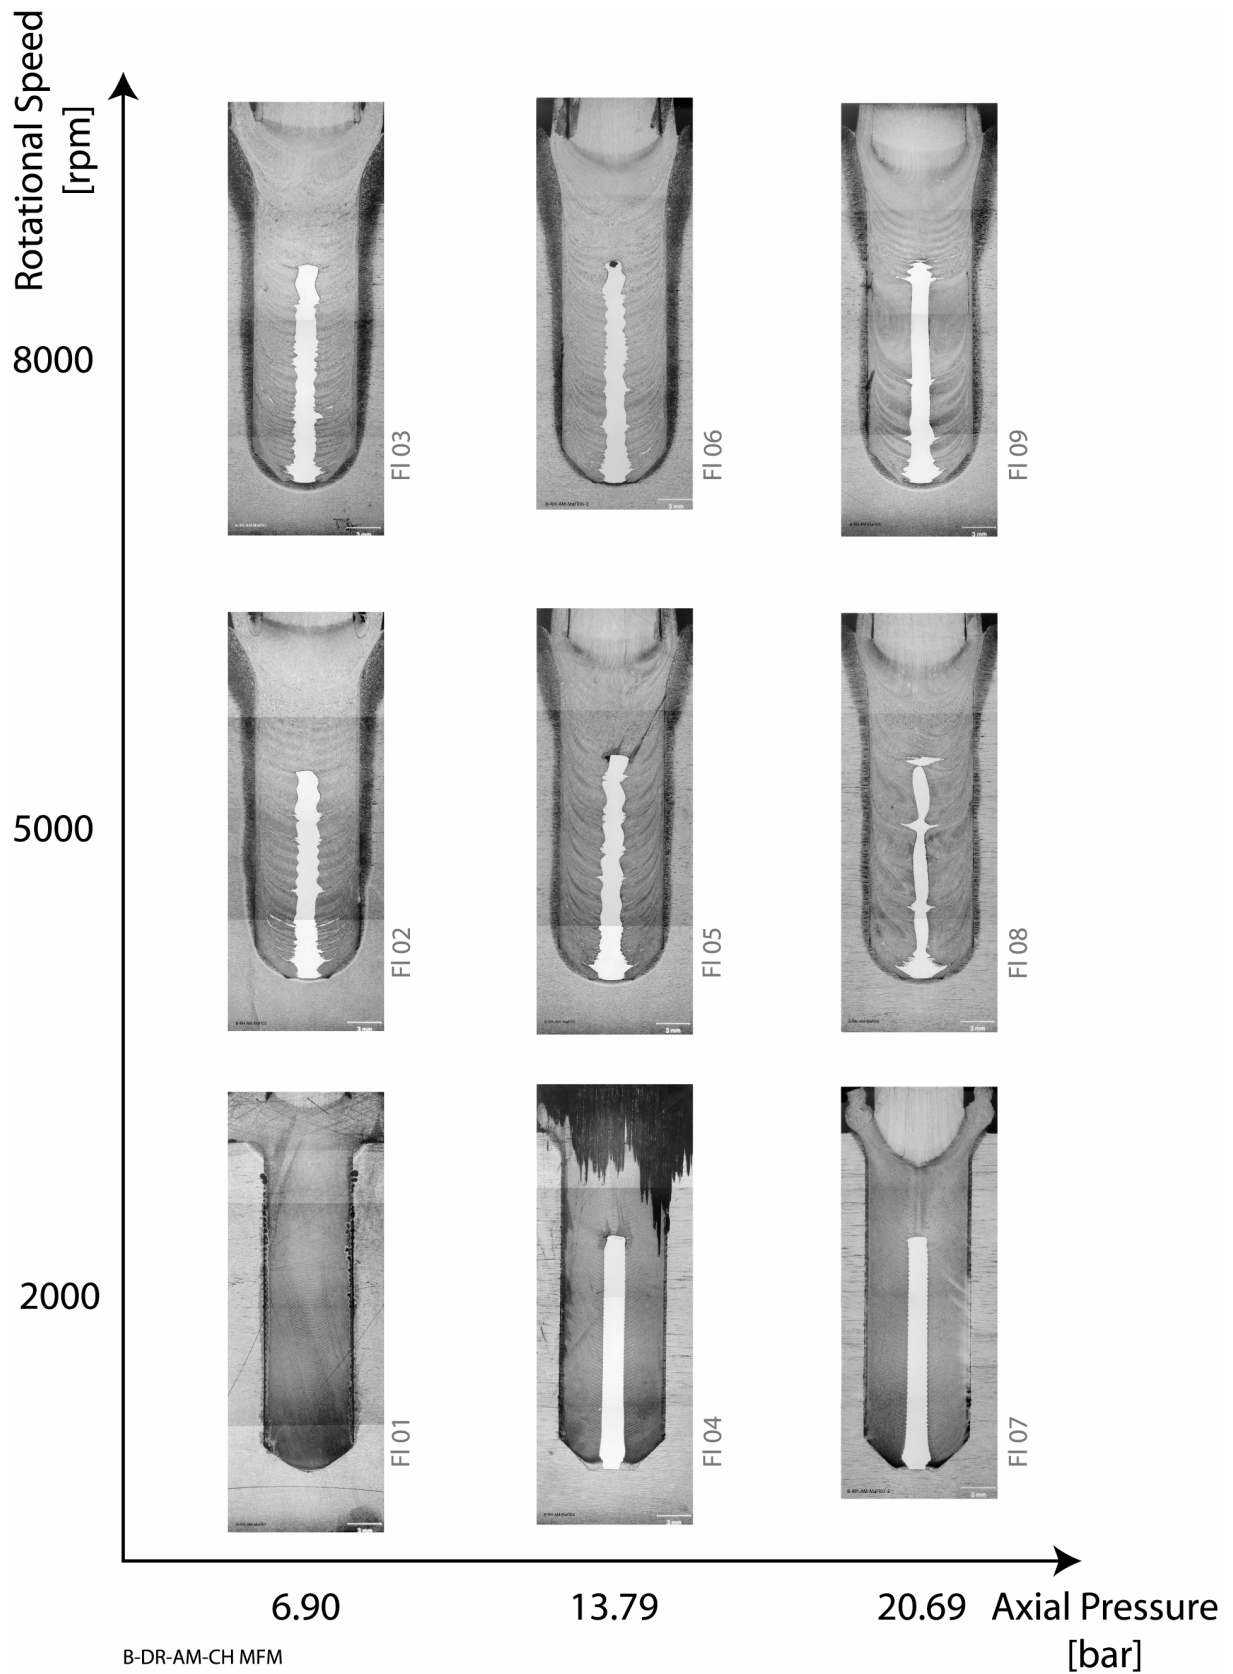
Macrographs of the 3x3 welding parameter matrix with nickel tracer studs.
